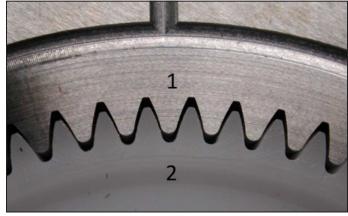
Plastic gear injection molding; 1 – tooling cavity, 2 – gear.
